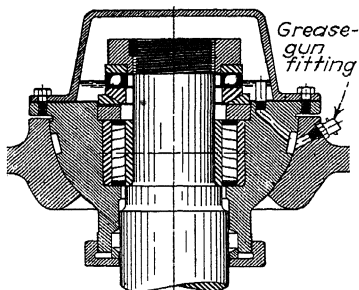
Grease lubricated suspension bearing equipped with grease-gun fitting for filling.
